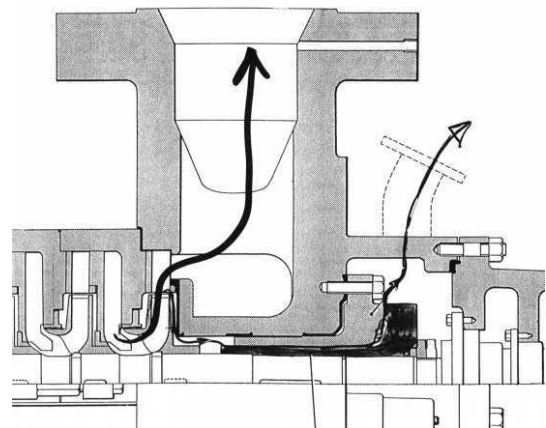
cross-section at discharge end of multi-stage pump showing balance valve
